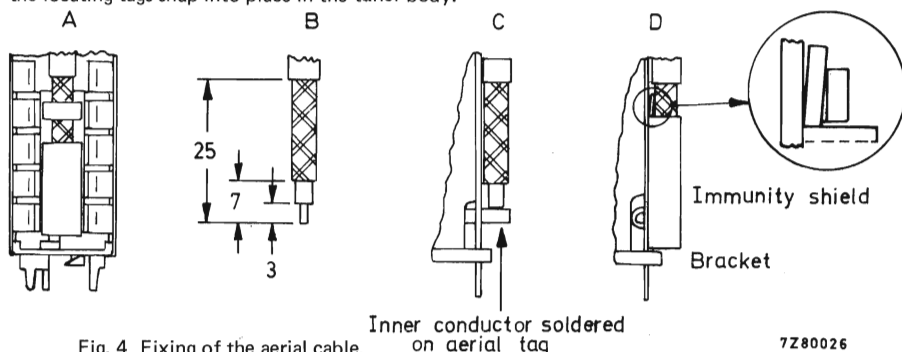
Fixing of the aerial cable. Inner conductor soldered on aerial tag
